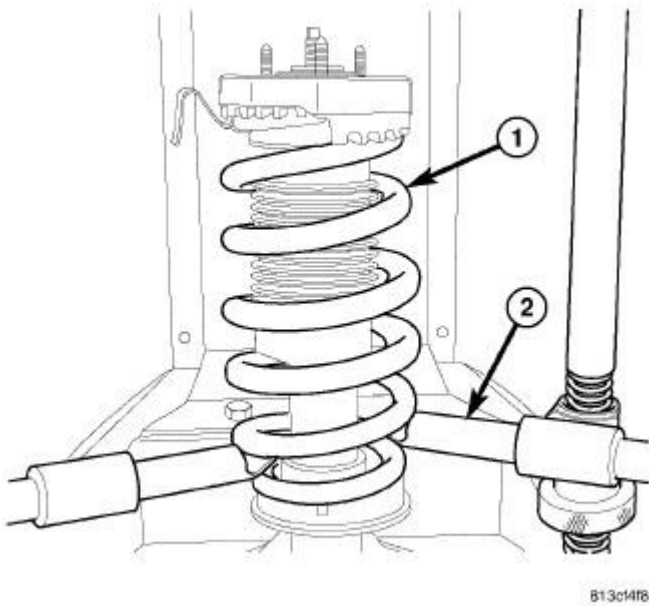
SHOCK ASSEMBLY IN LOWER HOOKS OF TOOL
